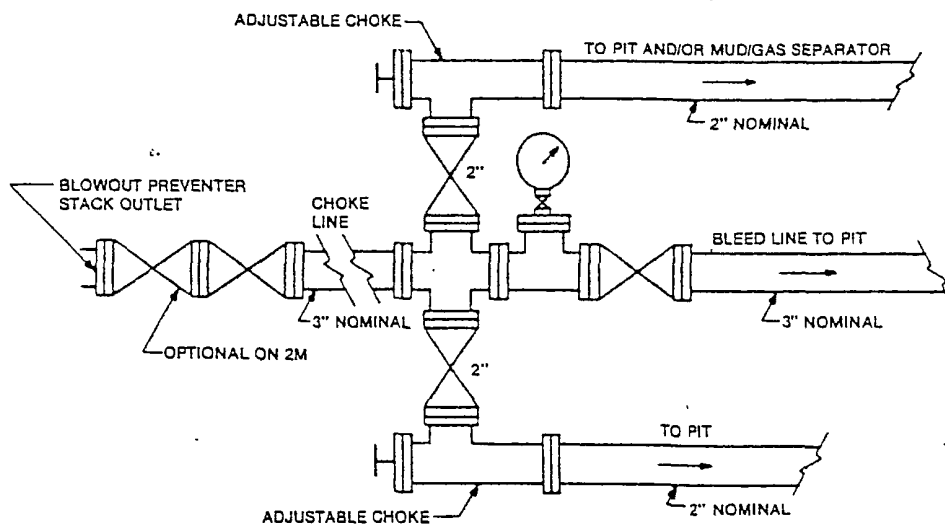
Typical choke manifold assembly for 2M and 3M rated working pressure service — surface installation.
